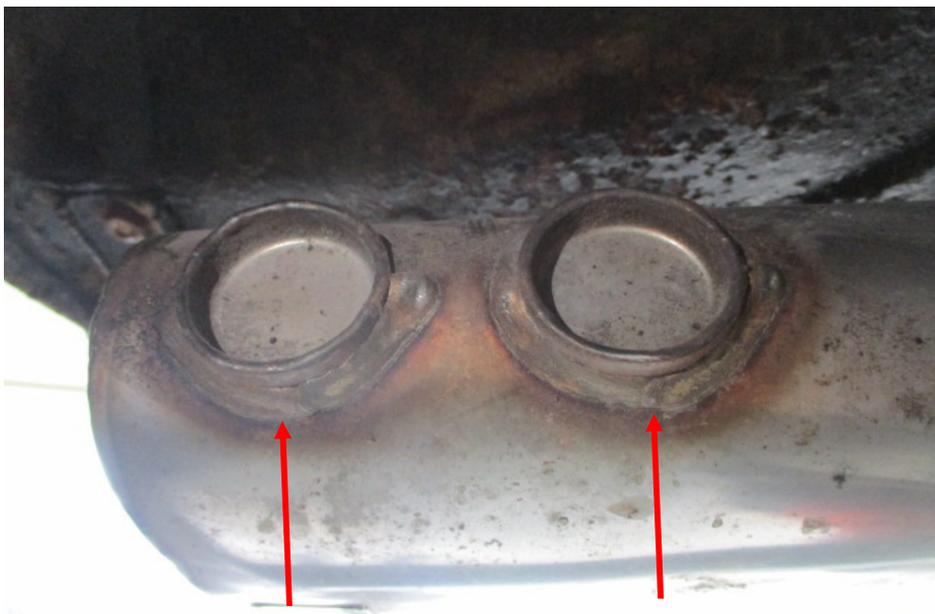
shows the 2 openings on the side surface of the rear exhaust muffler, facing the front of the Motor Car. The 2 openings were observed to be sealed with welding marks (arrowed) surrounding the 2 openings.
